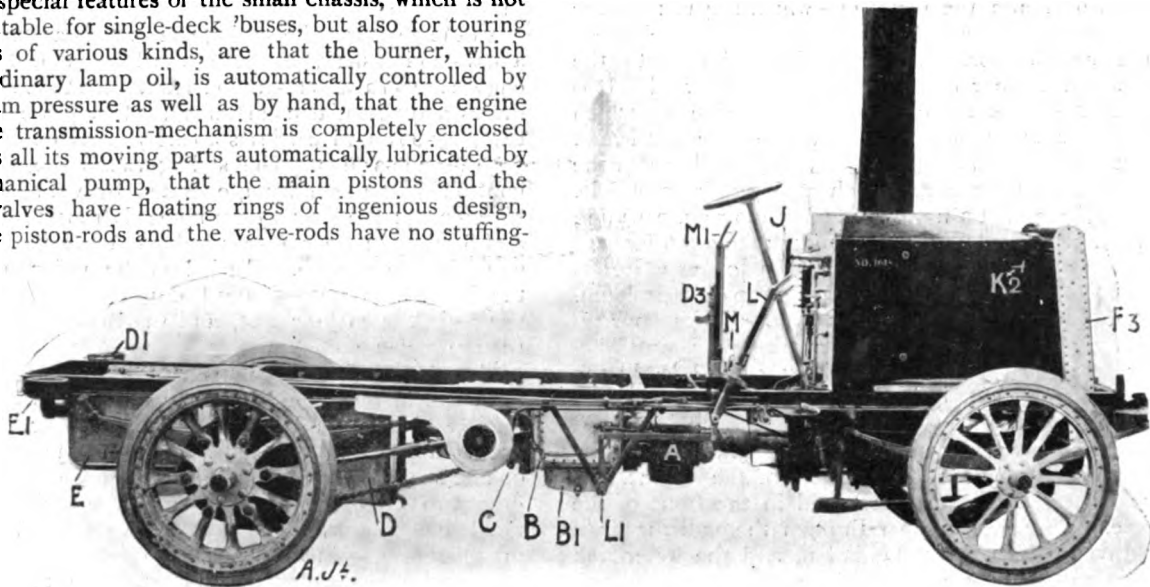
Side view of the Clarkson Steam Chassis, of the type constructed for single-deck 'buses and for touring vehicles.
